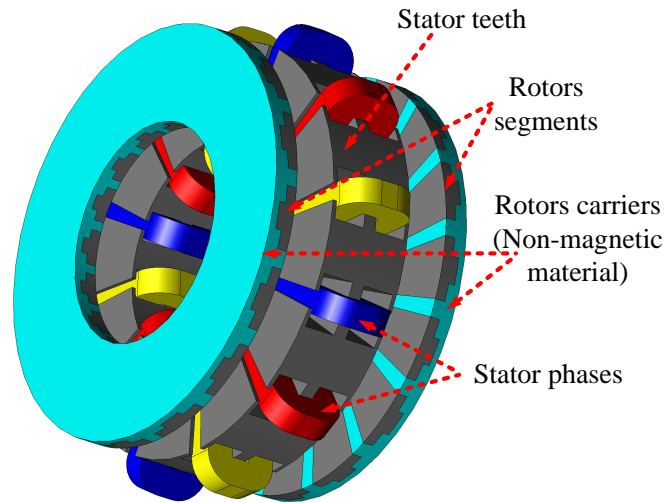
A 12/16 dual-rotor single-stator segmented-rotor AFSRM
